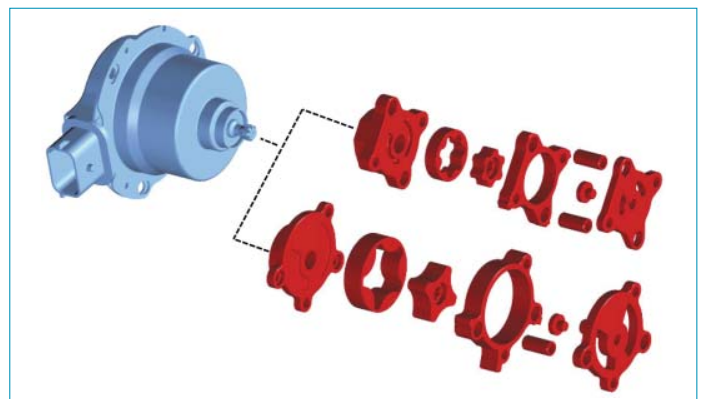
Clutch actuator pump (top) and clutch cooling pump (bottom)
